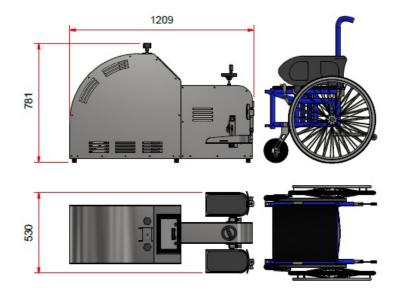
Device dimensions (mm) with a standard wheelchair to scale
